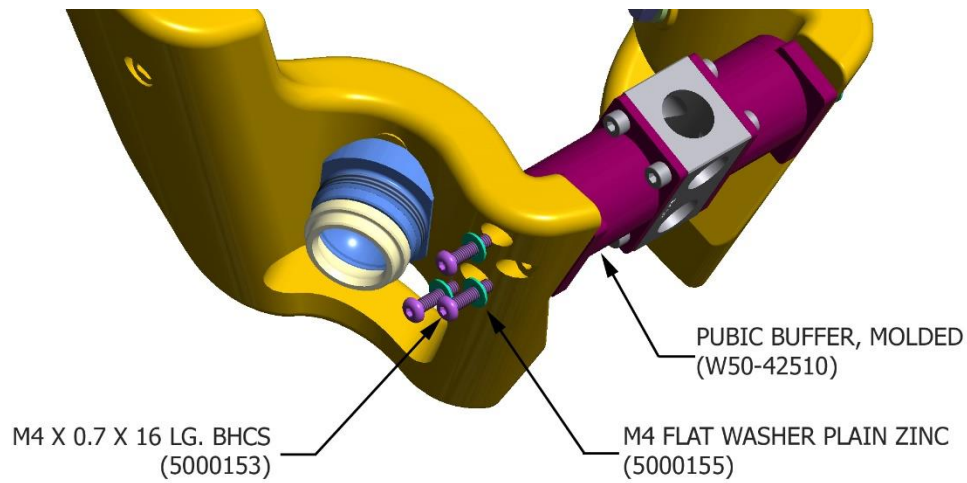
Separating molded pelvis bone from pubis assembly.
